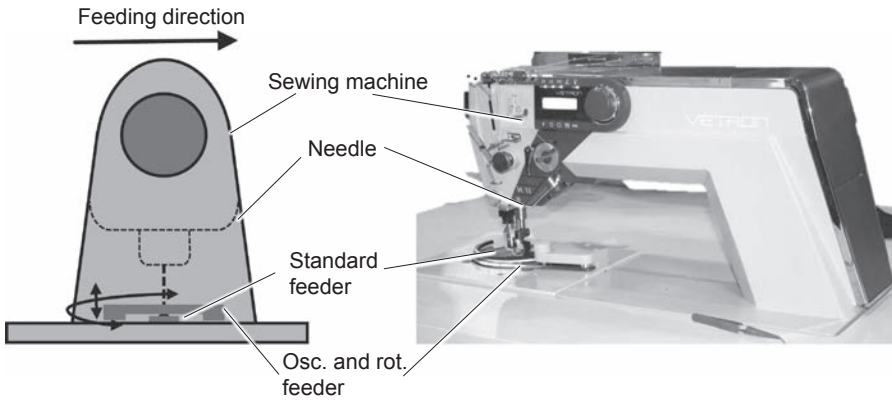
Vetron Autoseam machine for the automatic manufacturing of three-dimensional seams.
